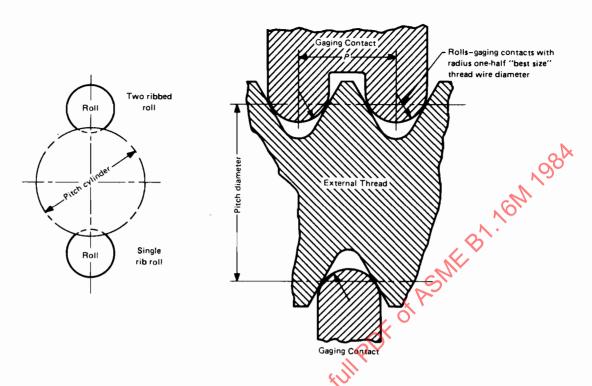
THREAD SNAP GAGES-MINIMUM-MATERIAL THREAD GROOVE DIAMETER LIMIT
